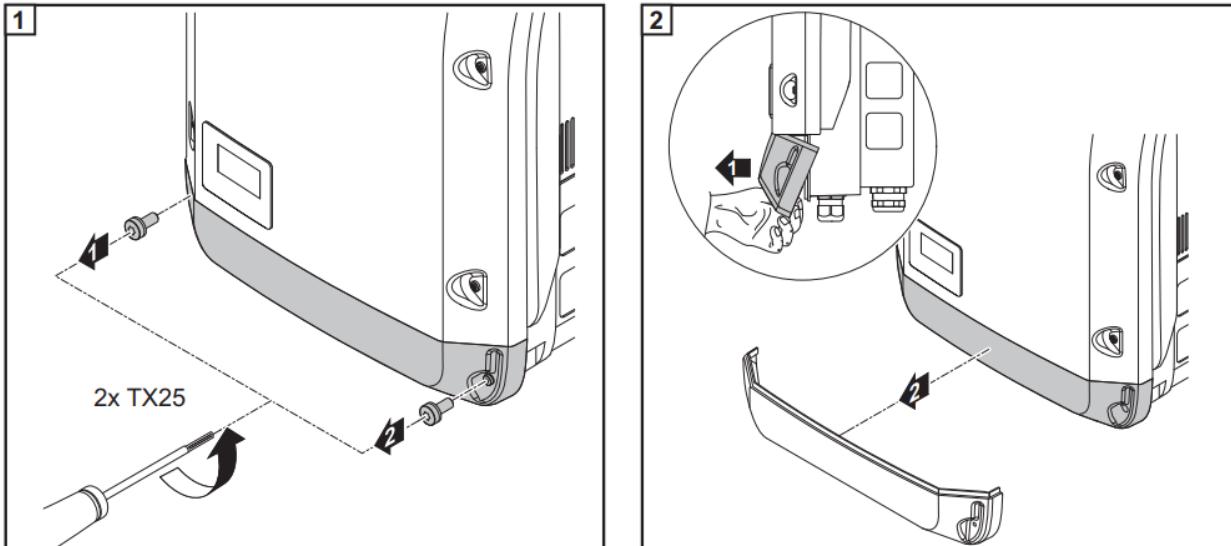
Remove screw and terminal block, insert DRM interface card
